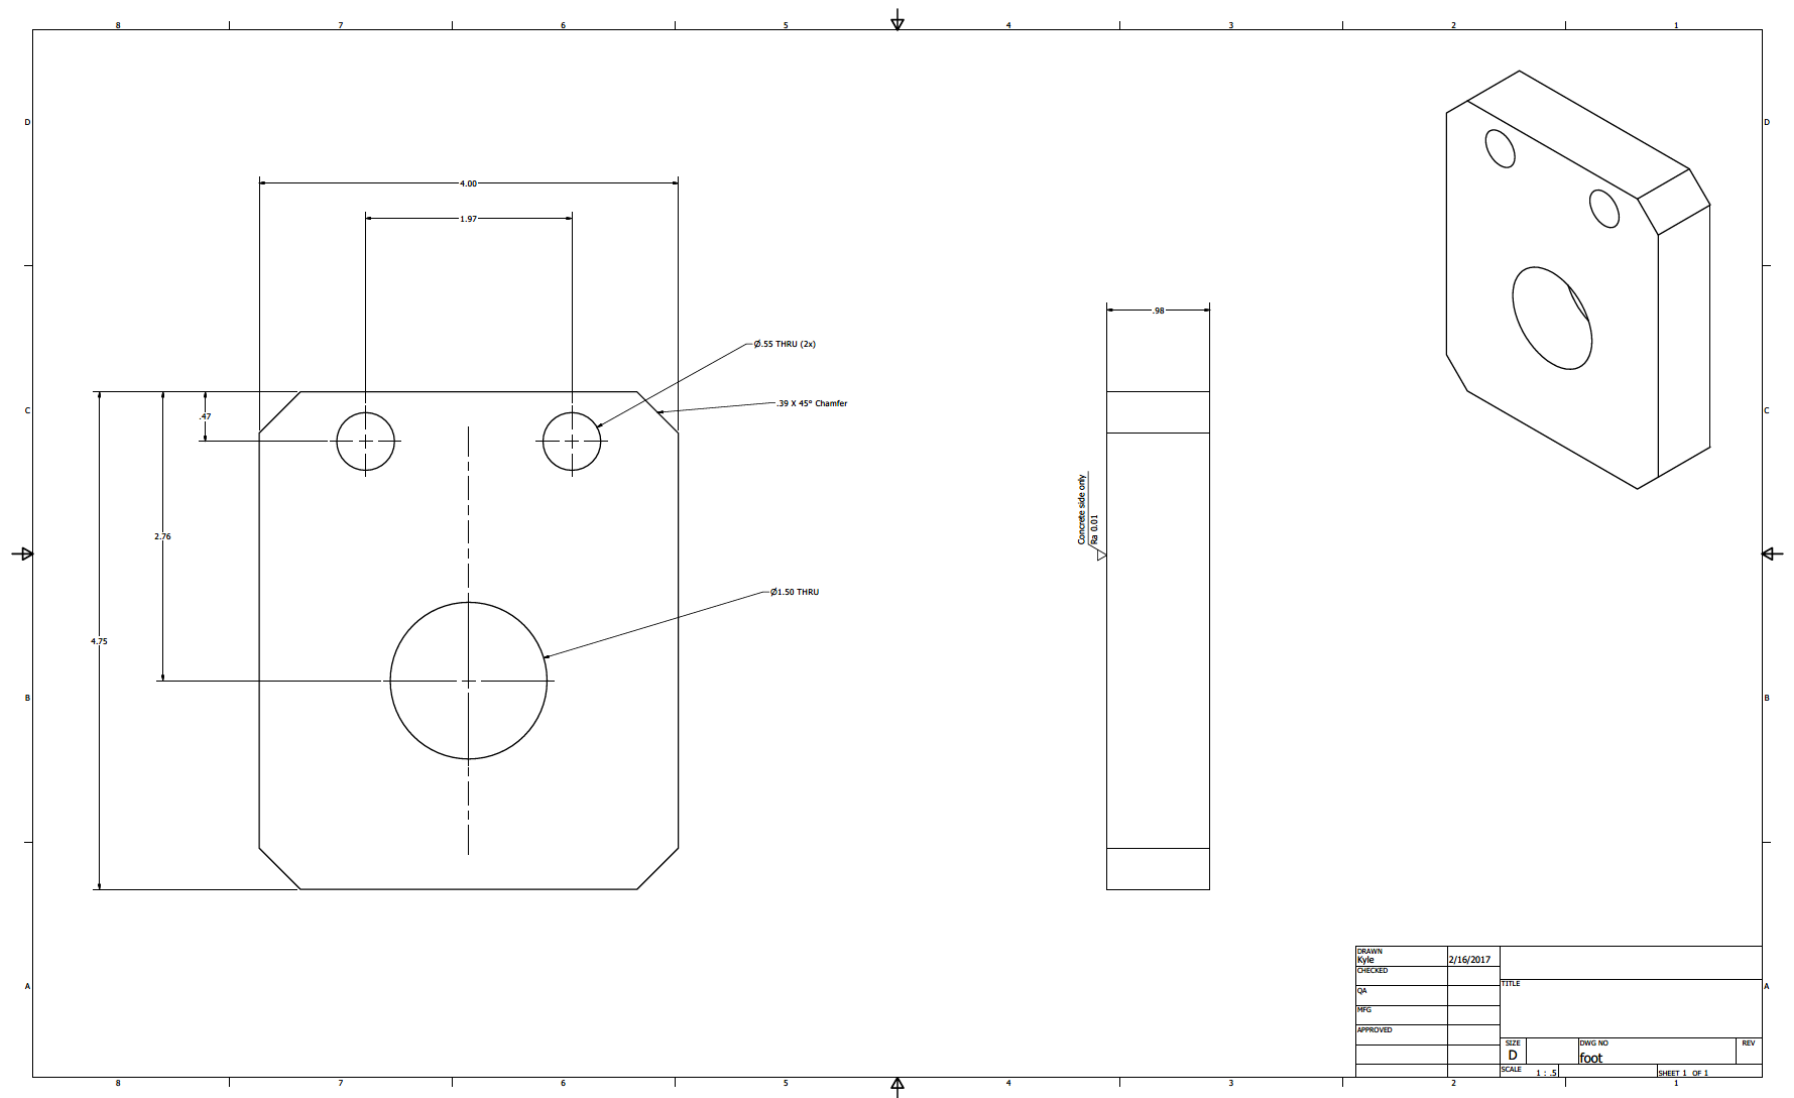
Foot of both short and long steel stands that will connect to floor.
